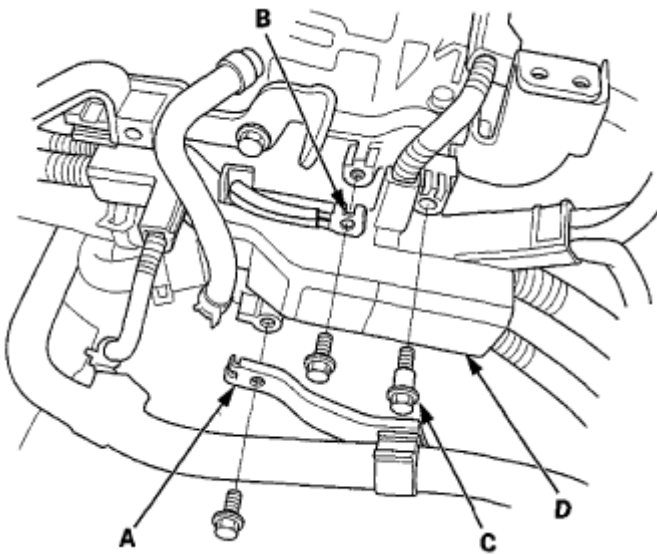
Locating Heater Hose Bracket And Ground Cable
